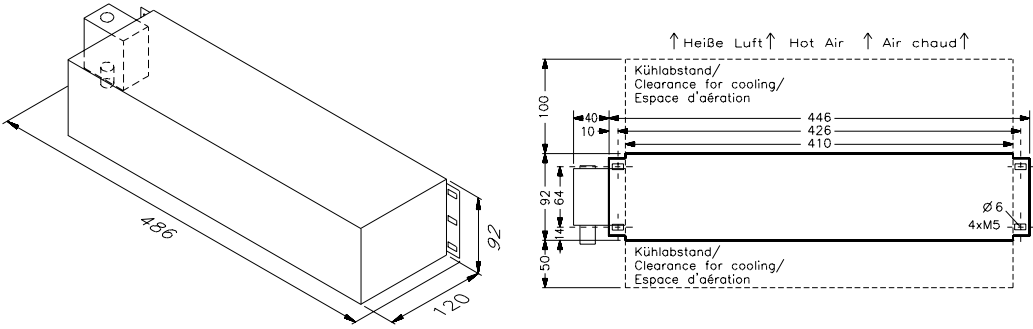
Outline drawing and mounting OPTION 100BR006
